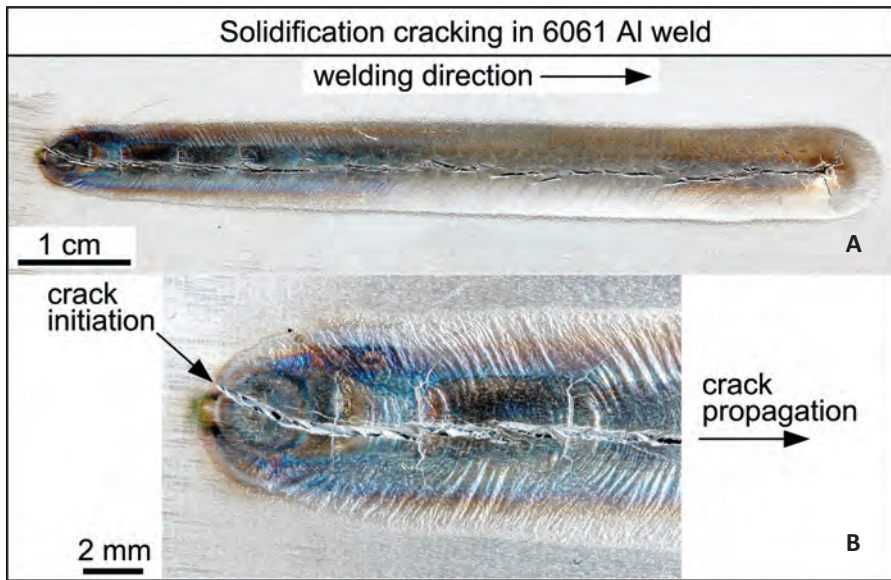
Solidification cracking in 6061 Al alloy. A — Overview; B — close-up view. Crack initiates at starting end of weld, from a nucleation site that is either inside the weld or at its surface. Gas tungsten arc welding, 90 A, 10 V and 2.5 mm/s, bead-on-plate welding, no filler metal, full penetration through 1.6-mm-thick sheet.
